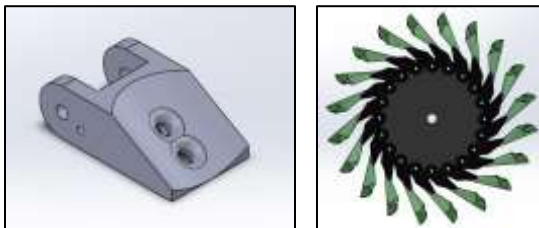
(a) PET Bucket Holder and (b) Runner Assembly with PET buckets and Holders
